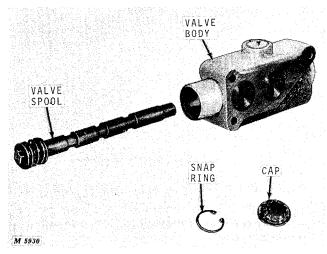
Removing Valve Spool From Valve Body -In-line Unit
